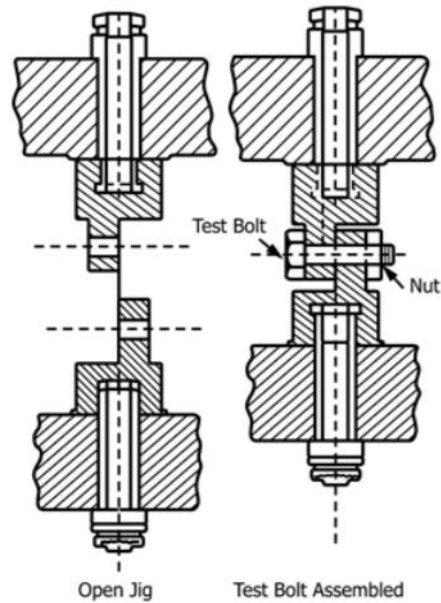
Typical setup for bolt shear testing (ASTM F606, 2016)
